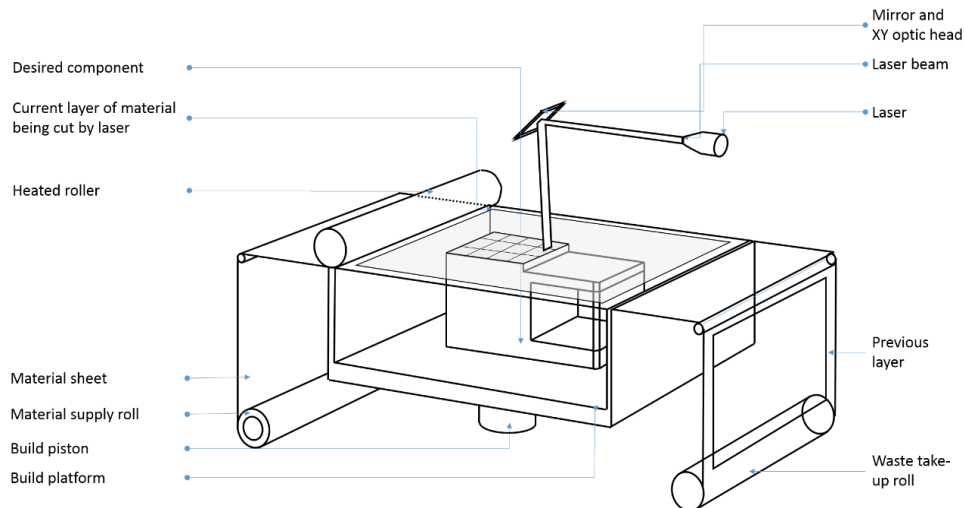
Laminated Object Manufacturing technology showing material layering and rolls
